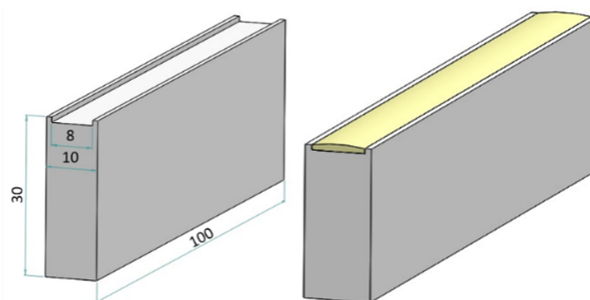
Dimensions and schematic view of specimens with powder adhered to its surface used in coatings for laboratory test.
